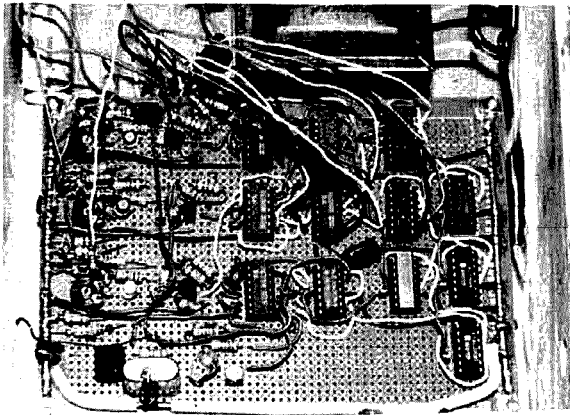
Photo F. Clock oscillator has prominent location in lower left corner of top board view.
